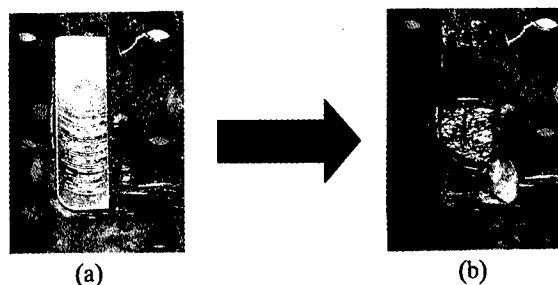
Photographs showing the change in shape of the Al-Ti-Mn alloy specimen by incomplete side extrusion. (a) and (b): before and after the extrusion, respectively.
